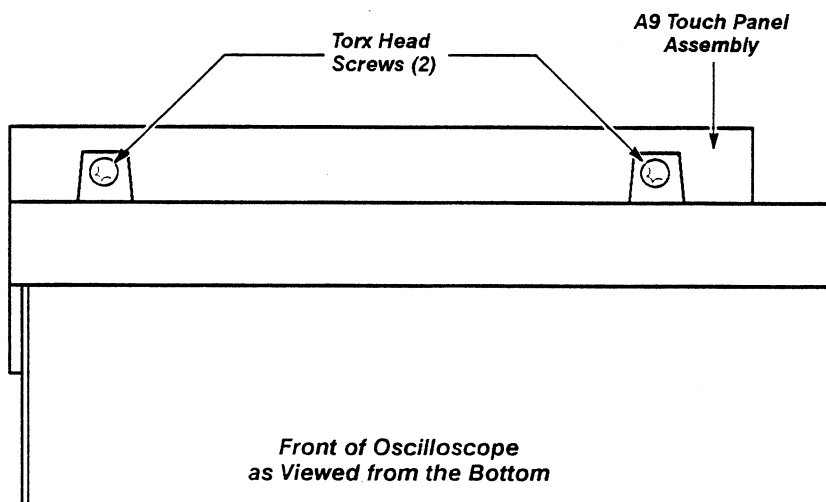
A9 Touch Panel Assembly Torx Head Screws
